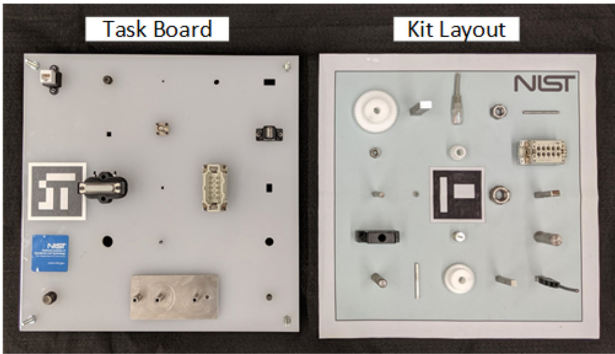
Assembly setup prior to the competition start used during the IROS 2017 Grasping and Manipulation Challenge: Manufacturing Track. The disassembled task board is on the left. A kit layout on the right is used as a template for presenting the parts to the robot system.
